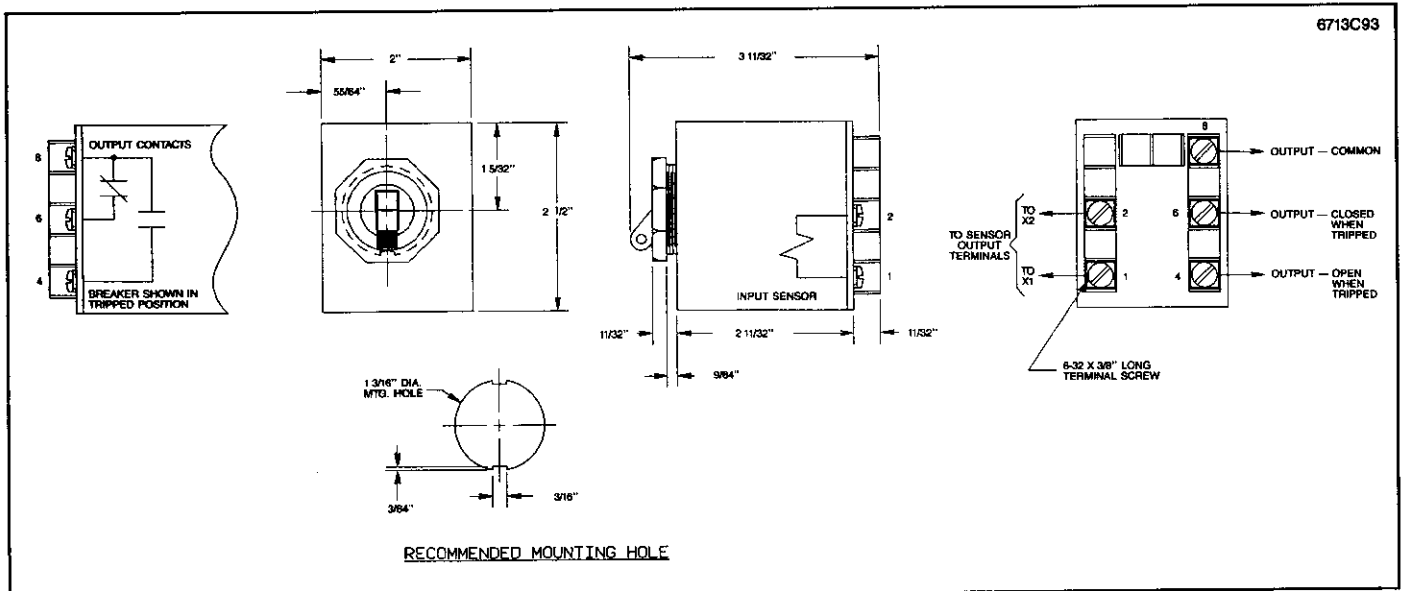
Outline Dimension Drawing, Type GR1 and Type GRT1 (Dimensions in inches)
